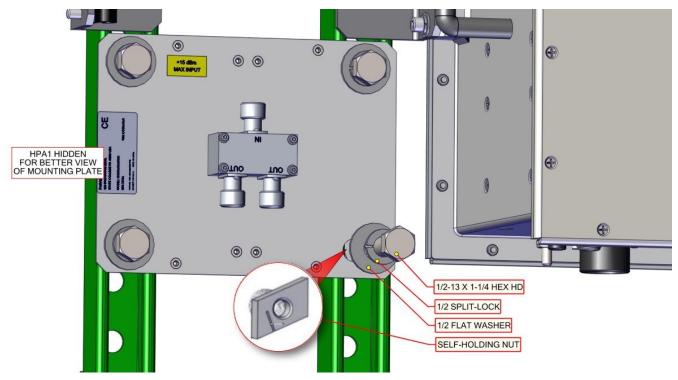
Mount Input Plate Assembly to Frame (S-Band)
